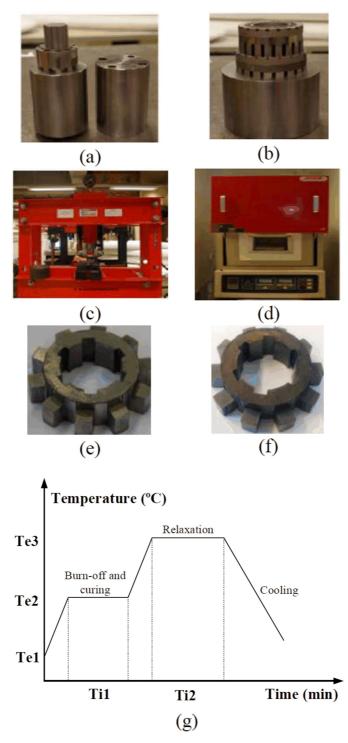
Manufacturing facilities and SMC cores for the proposed 3D TFM, (a) die tools for compaction of rotor core, (b) die tools for compaction of stator cores, (c) hydraulic compact machine, (d) high-temperature furnace, (e) rotor core before heat treatment, (f) rotor core after heat treatment, (g) heat treatment plan.
